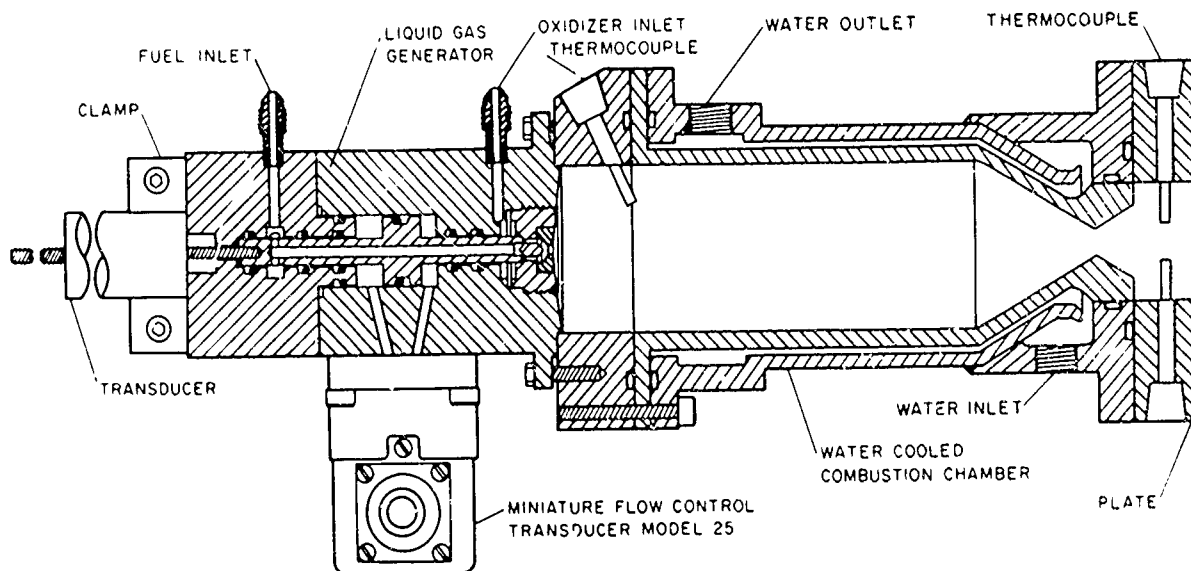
0-35-Pound Gas Generator Static Assembly.
